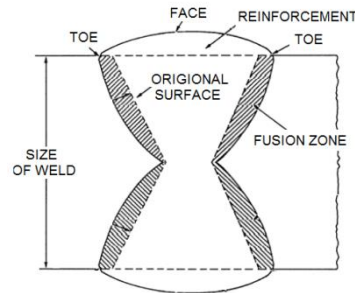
SCHEMATIC VIEW OF DOUBLE SIDED WELD [22]
